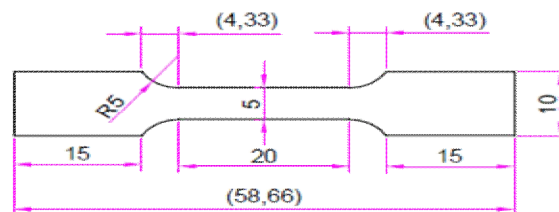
3 Flat tensile subsize weld specimen. All dimensions are in ‘mm’
